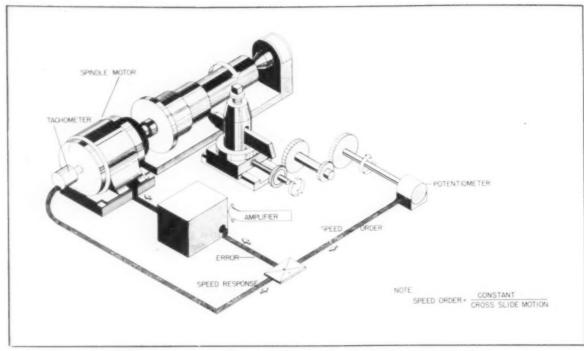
Spindle-drive servomechanism for constant-speed surface cutting.
